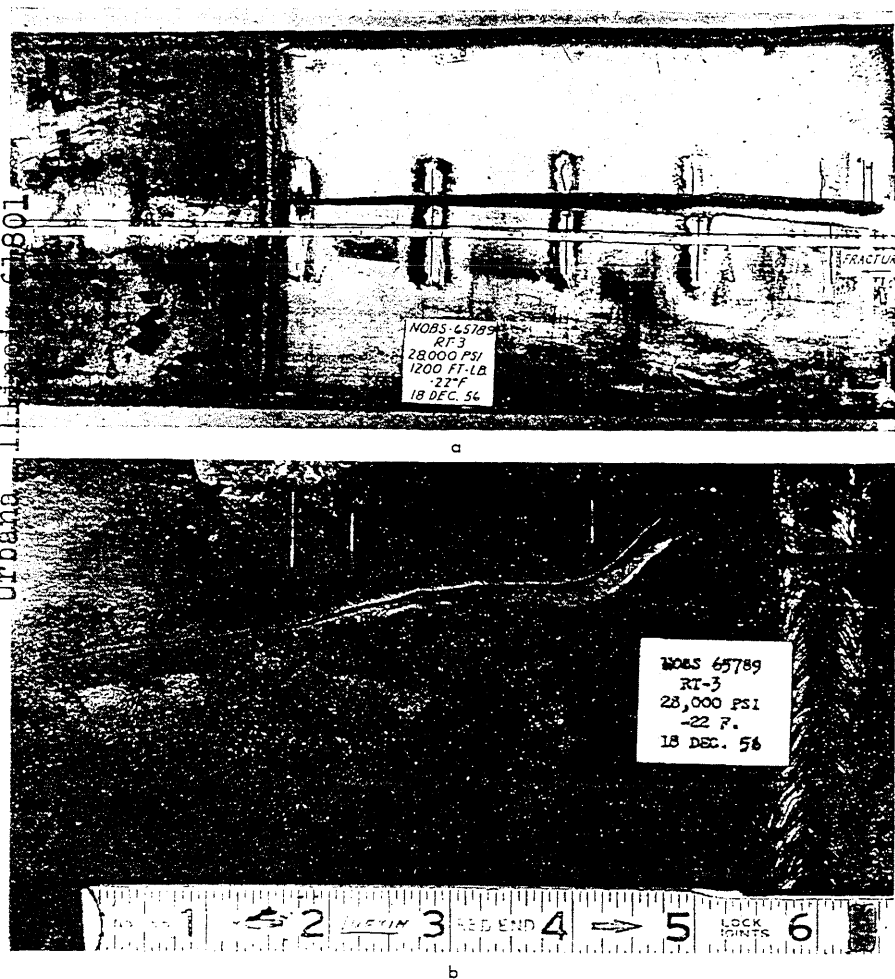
Arrest of 4-ft long crack by 24-in. wide strake of T steel
